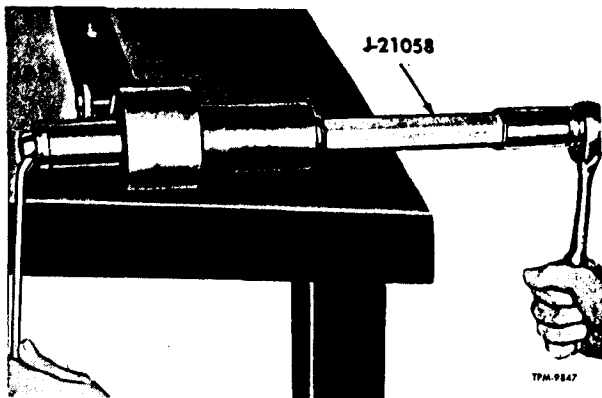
Removing Rubber Type Eye Bushing (Typical)
